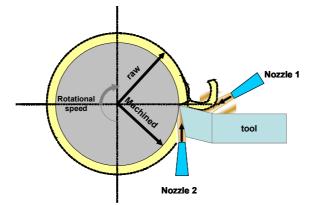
Cross section of the external turning operation. Fluid nozzle 1 is blocked up by the chip. Fluid nozzle 2 is blocked up by the tool flank surface and also by the turning rotational speed.
